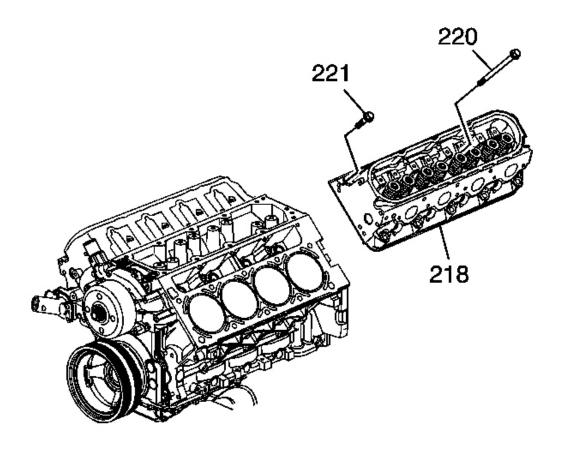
View Of Cylinder Head & Bolts Courtesy of GENERAL MOTORS CORP.
